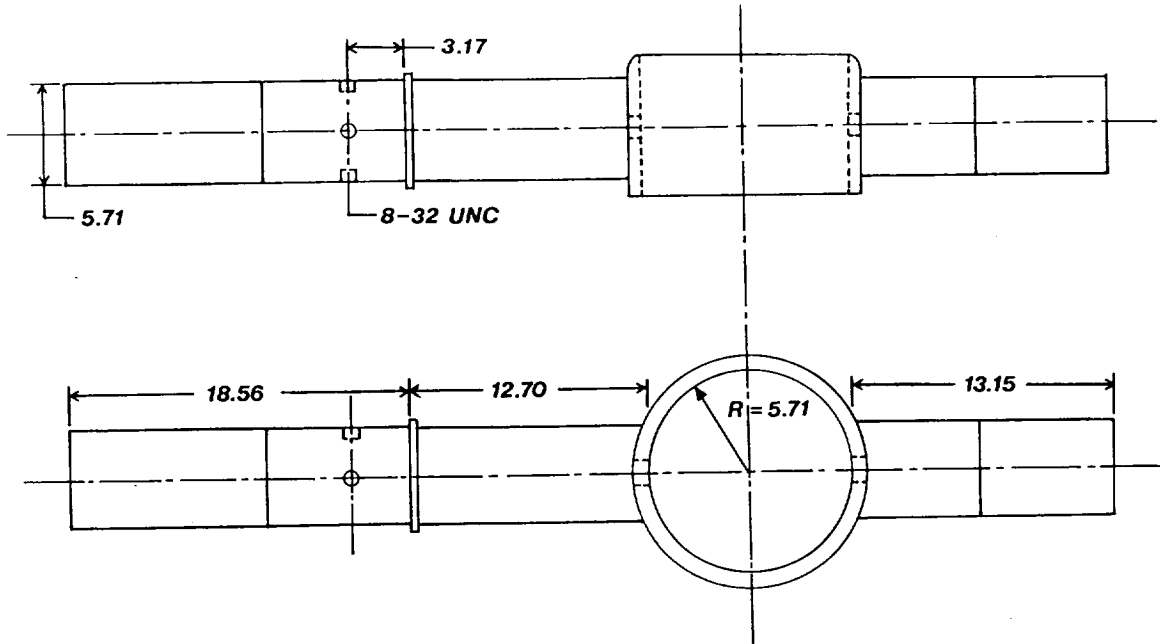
Probe of PVM-100A; top view (upper), rear view (lower). Dimensions in cm.
